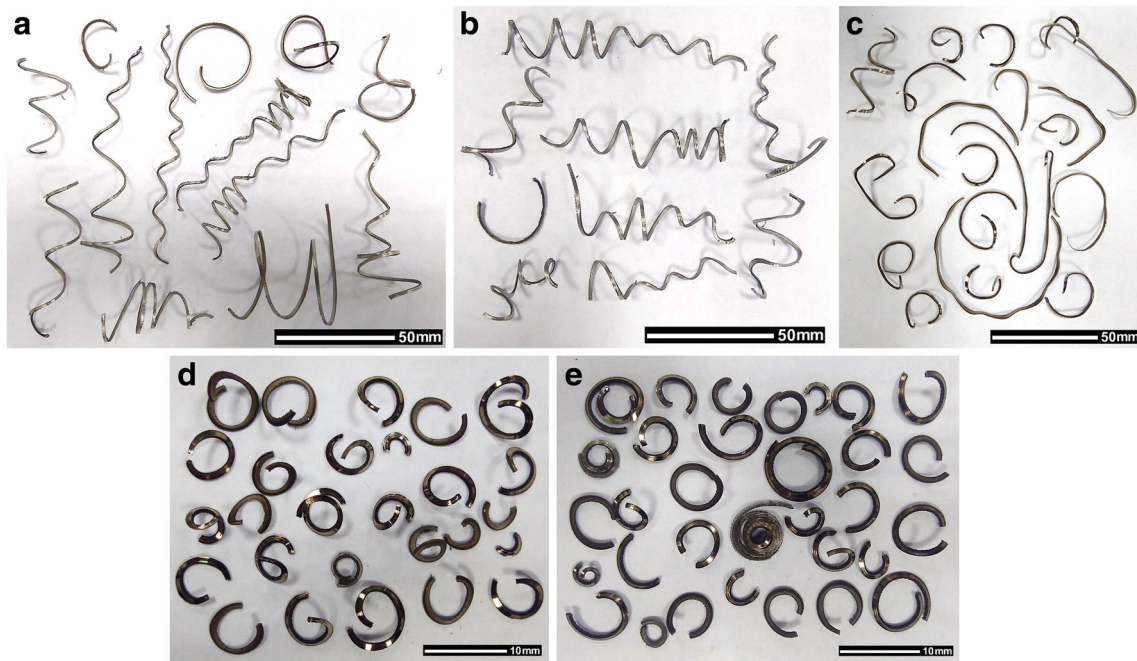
AISI 1020 steel chips obtained from cutting test with: a uncoated tool, coated tool with bilayer number: b tool/[HfN/VN]₁, c tool/[HfN/VN]₃₀, d tool/[HfN/VN]₅₀, and e tool/[HfN/VN]₈₀
